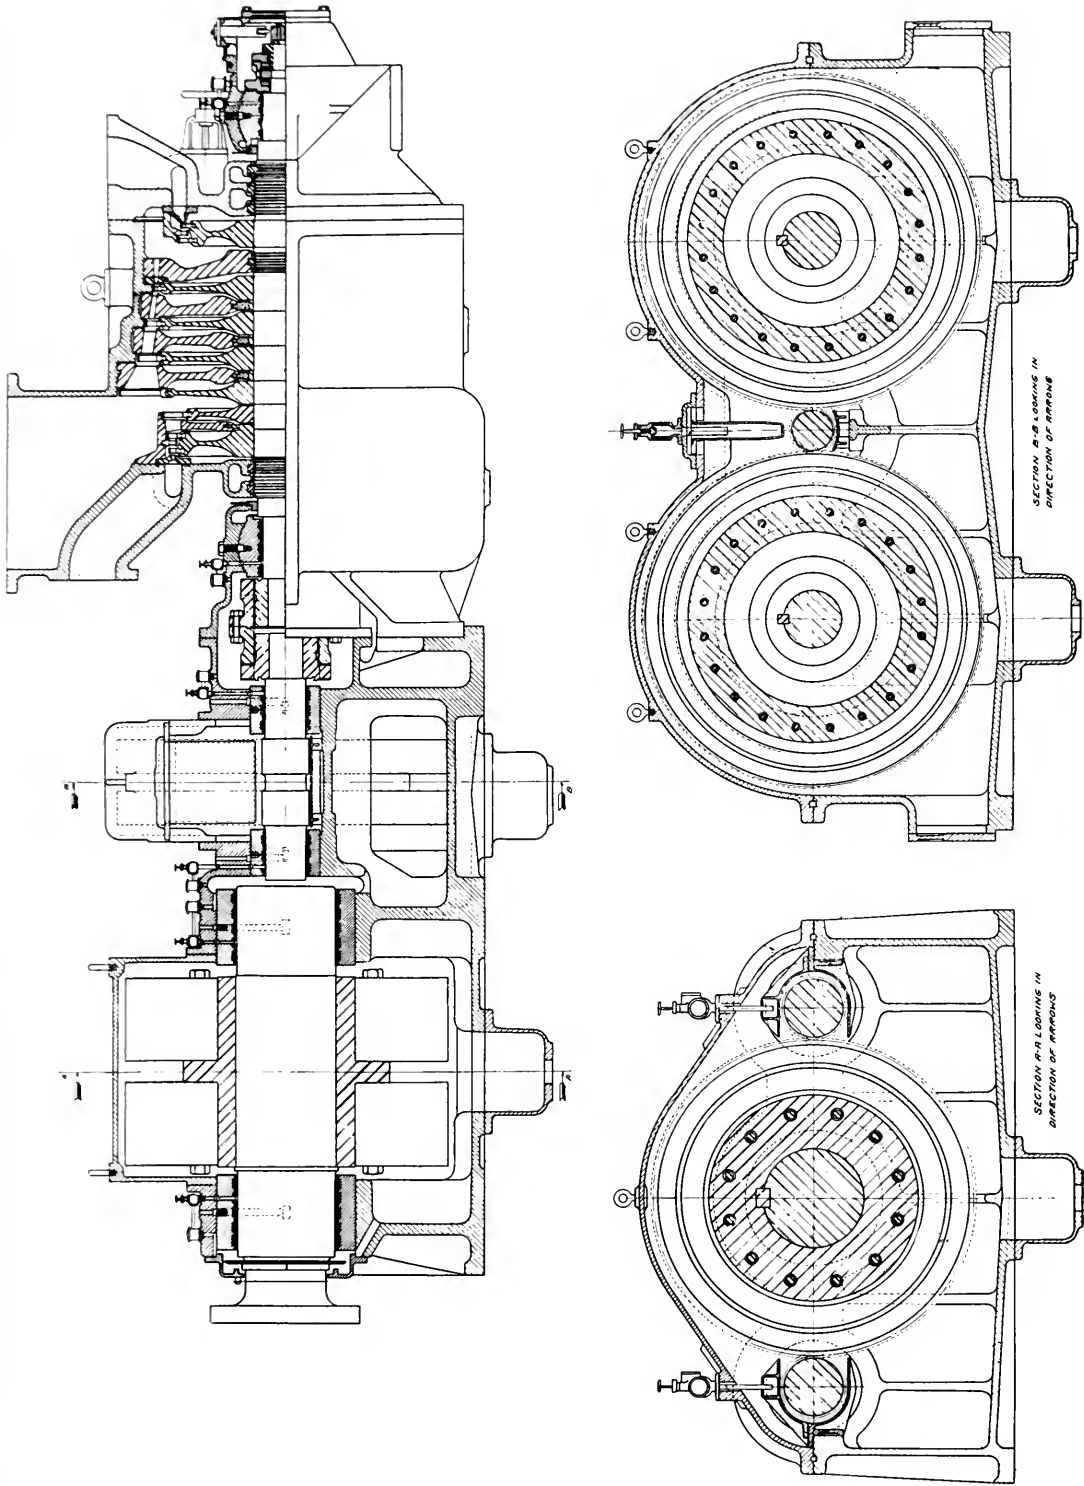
Sectional Views of Turbines and Reduction Gears for Ship Propulsion
